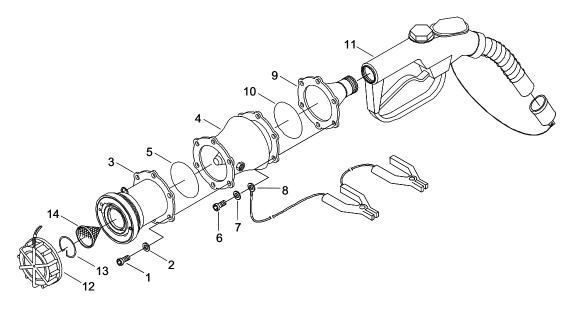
1 In. Fuel and Oil Service Nozzle Assembly.
